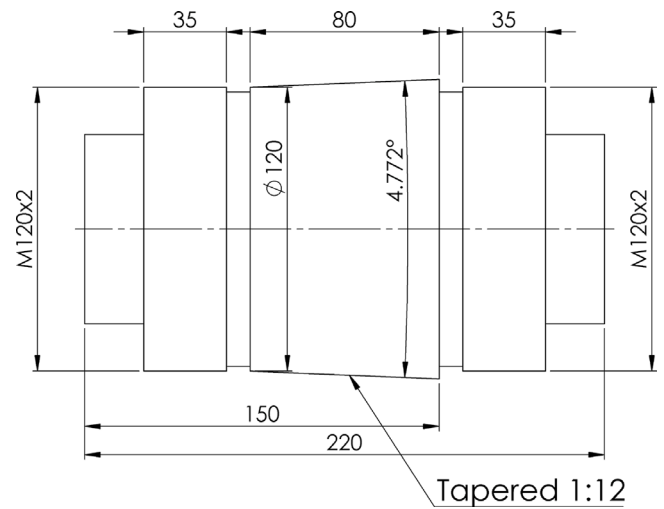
Drawing of the shaft stud designed for the experimental campaign.
